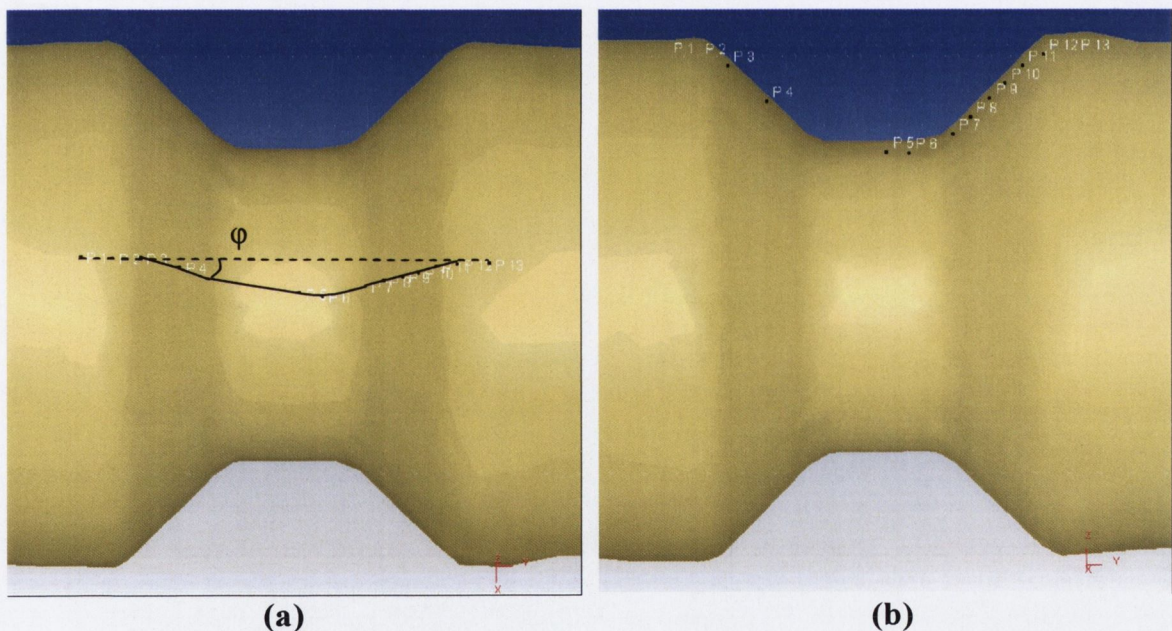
(a) Plan and (b) side view of the workpiece surface after 7 rotations.
